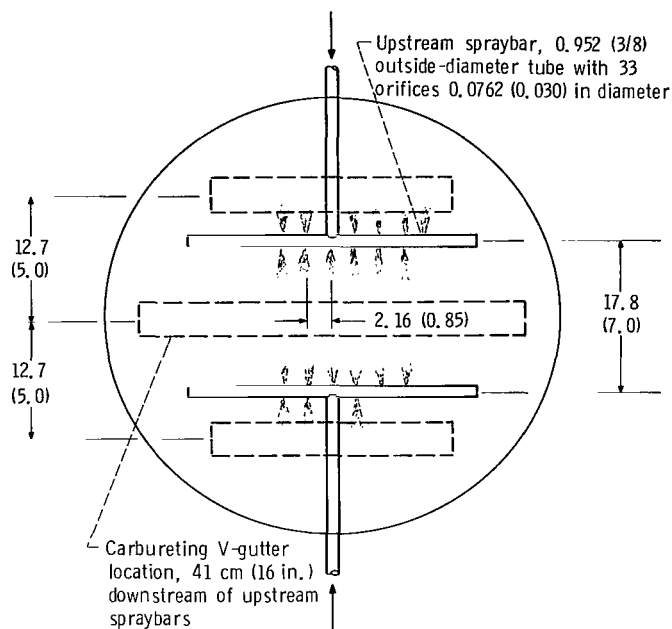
Upstream fuel spraybars for carbureting V-gutter configurations. Dimensions are in centimeters (in.).
